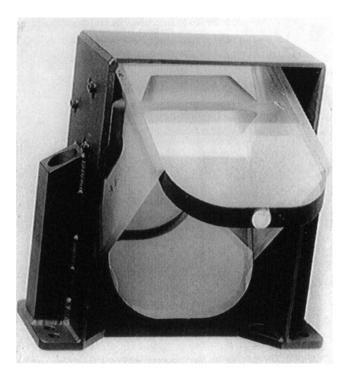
Photograph of the penta mirror subassembly of Fig. 9.22 mounted in its Invar housing. (From Yoder.¹⁵)
